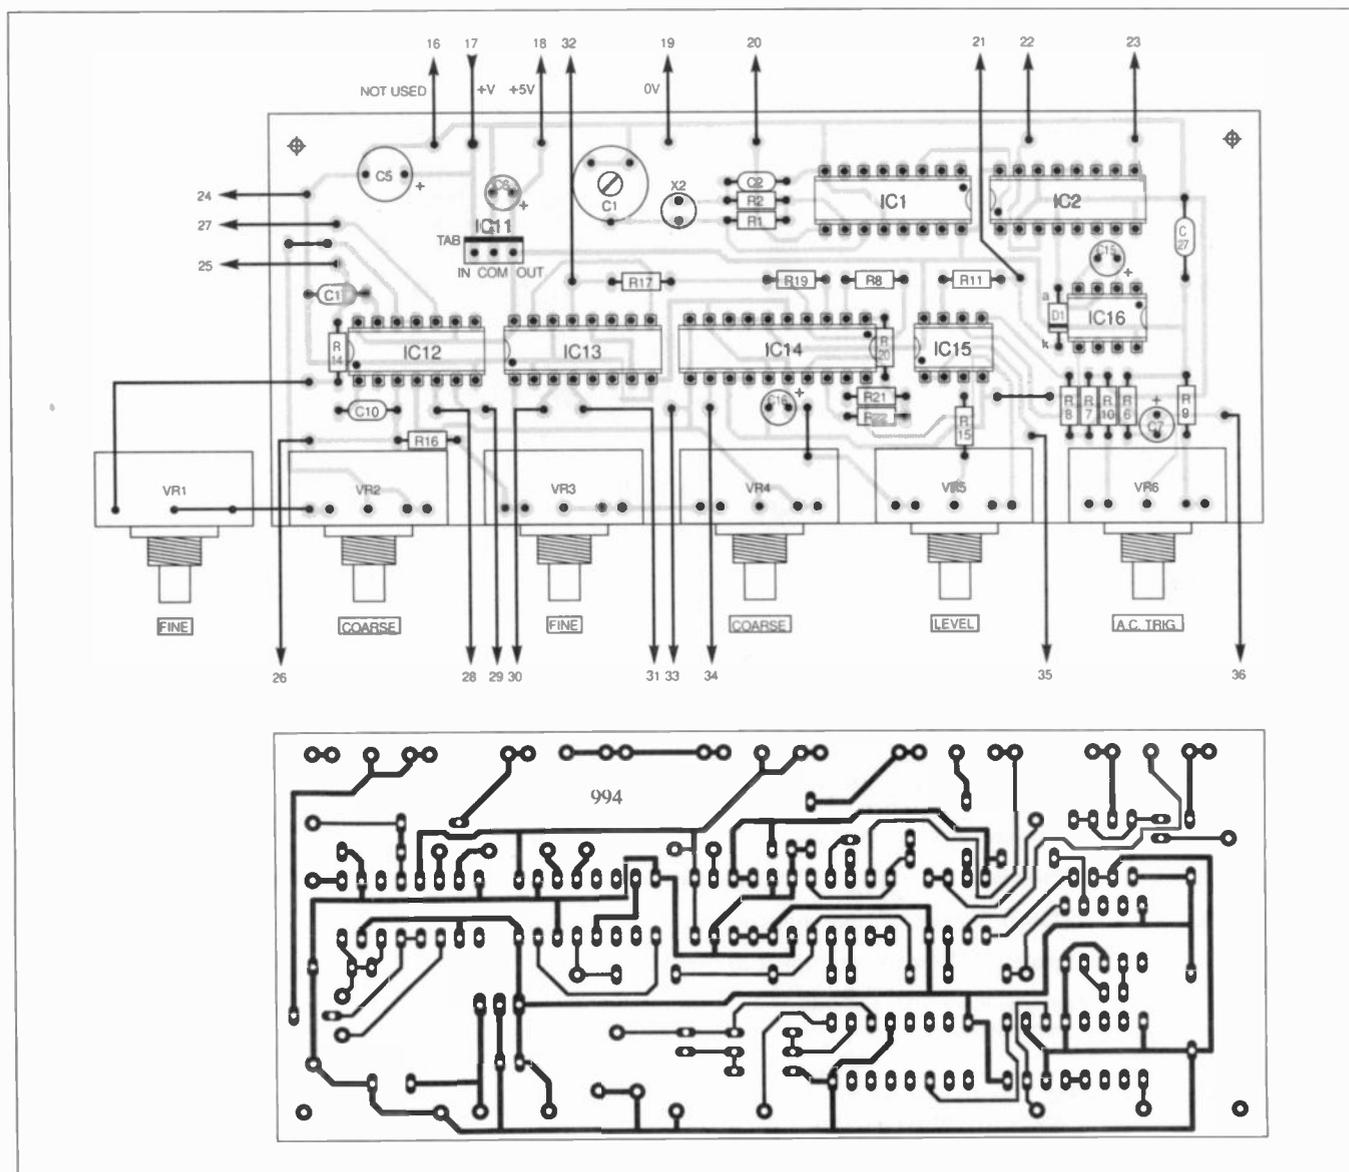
Component layout and full size copper foil track master pattern for the main oscillator printed circuit board.
